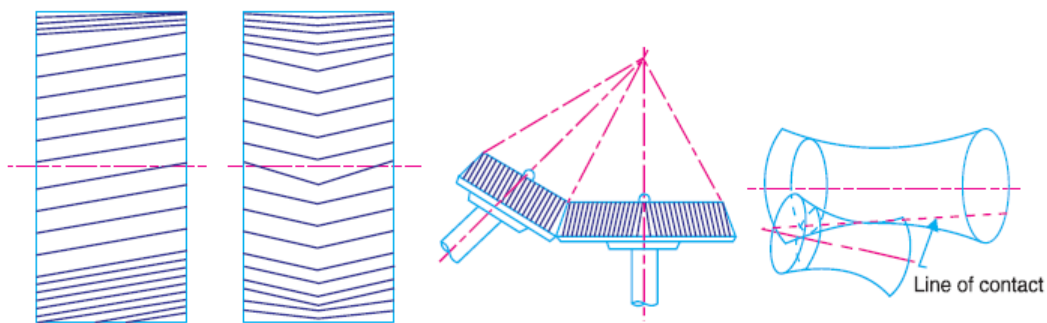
(a) Single helical gear. (b) Double helical gear. (c) Bevel gear. (d) Spiral gear.
